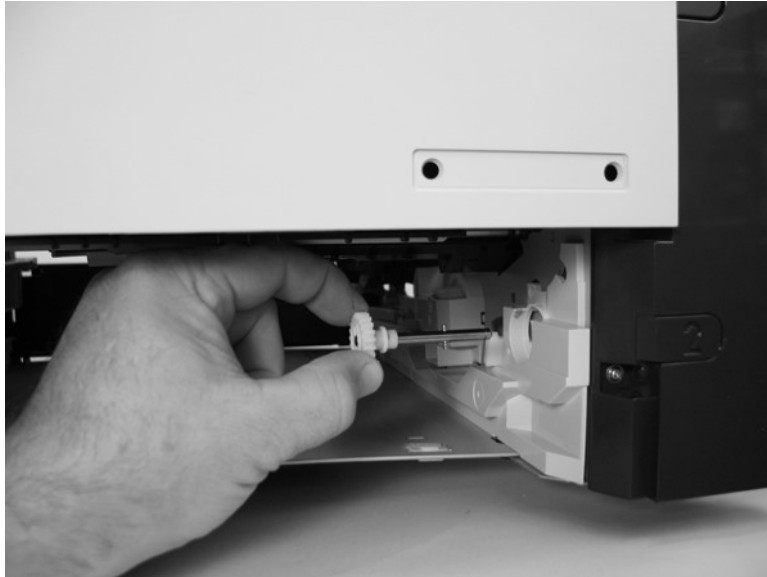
Remove the pickup-drive assembly (5 of 7)
